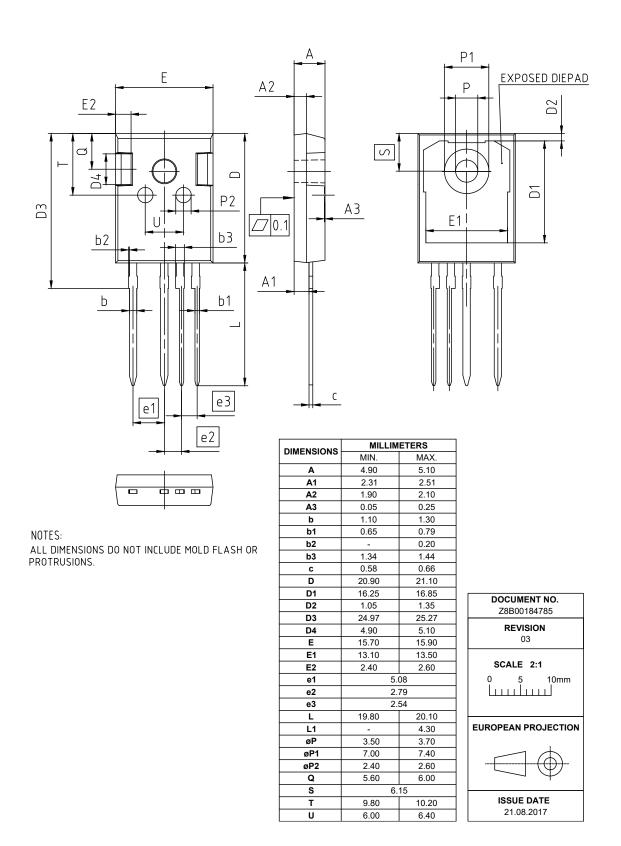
Outline PG-TO247-4-3, dimensions in mm
